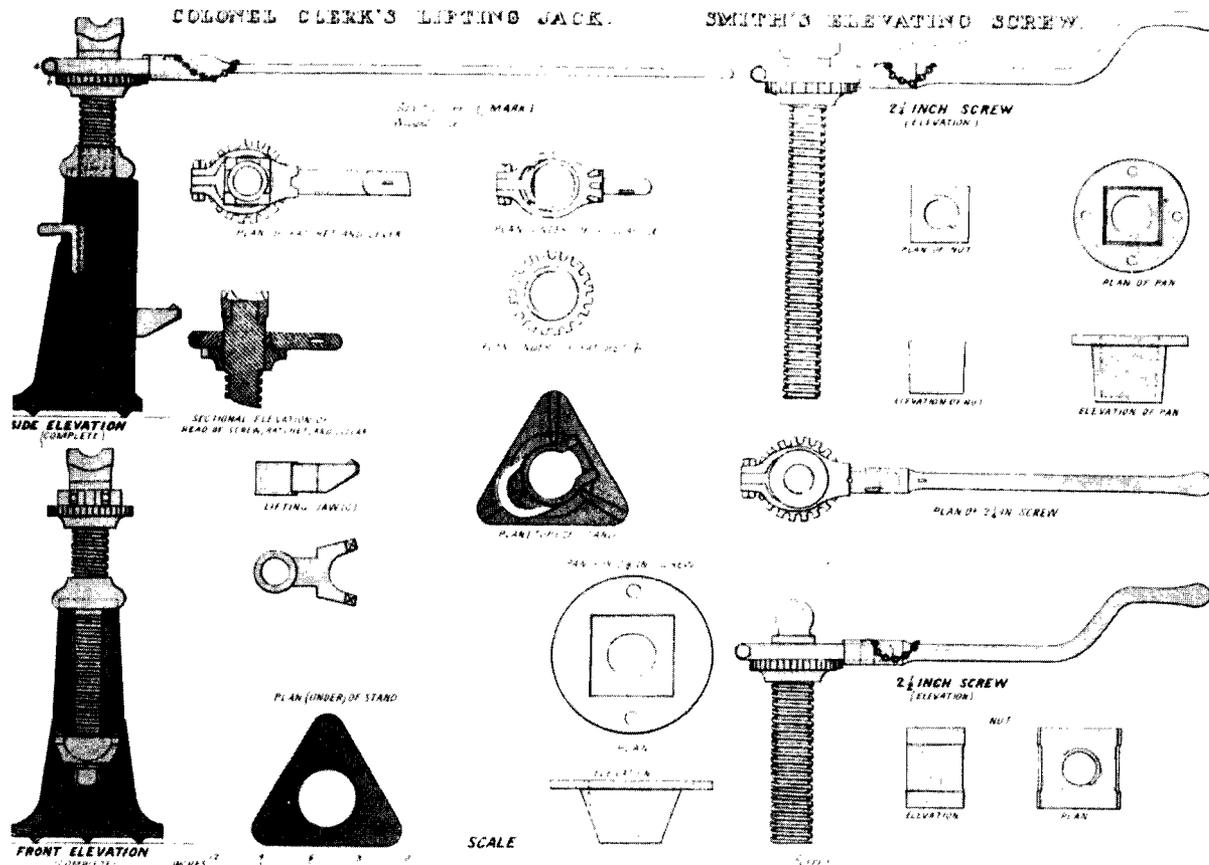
Colonel Clerk's Lifting Jack. Smith's Elevating Screw. (The Royal Artillery Institution, Woolwich, U.K., Royal Carriage Department, Plate 75, September 1870.)
